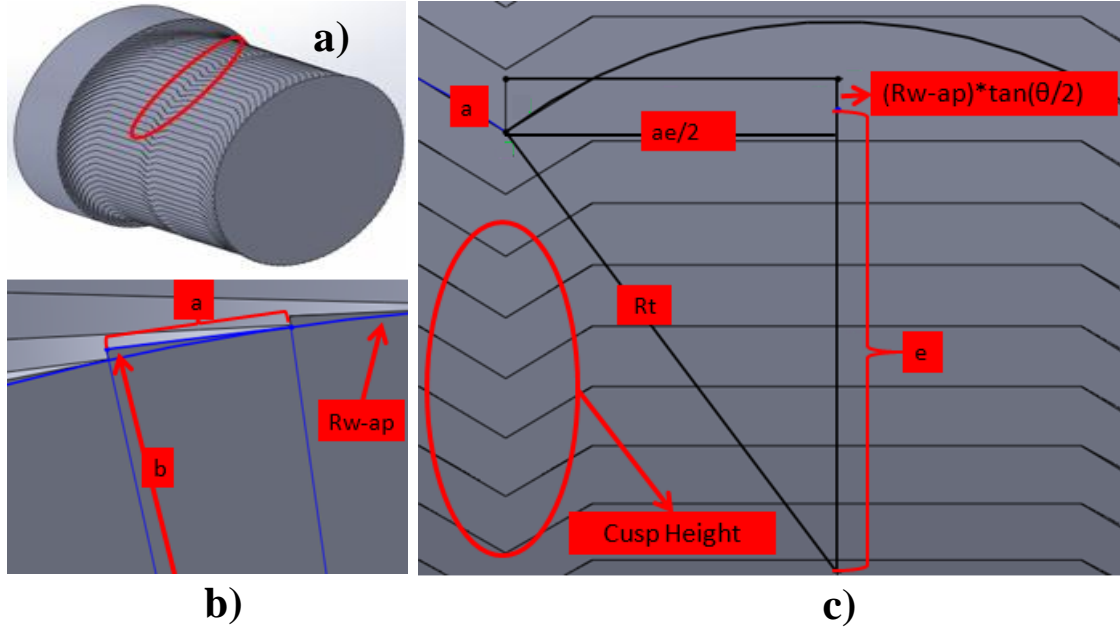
a) Isometric view, b) side view and c) top view of turn-milled part
